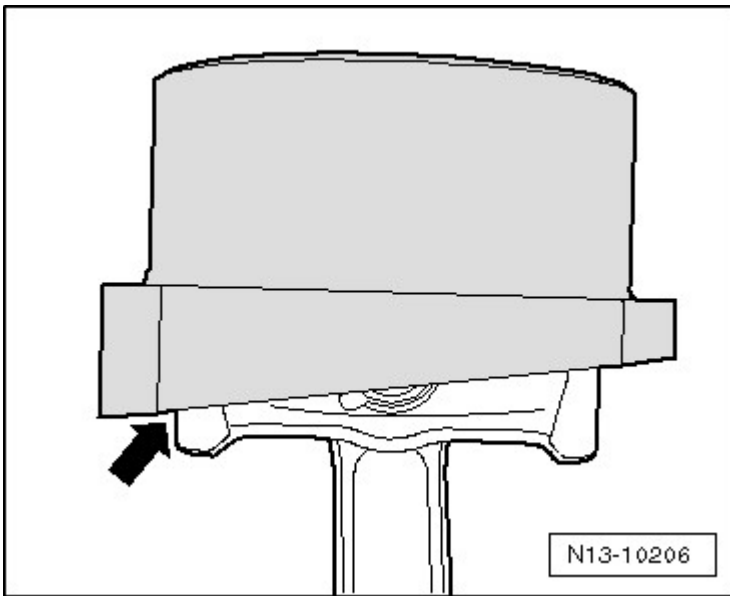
Sliding Correct Piston For Each Cylinder From Above Into Piston Installation Tool
